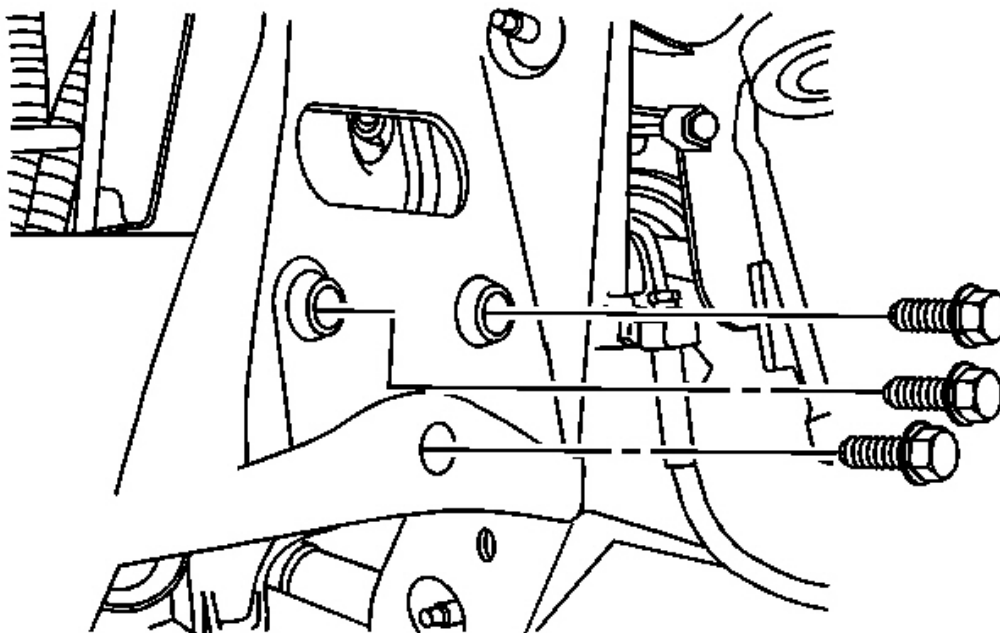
View Of Frame Engine Mount Bracket Bolt Locations
